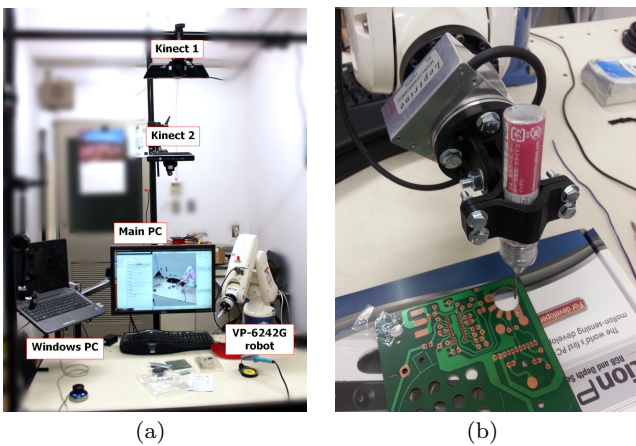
(a) The helping hand robot system for the soldering task. (b) The 3D printed solder wire holder.
